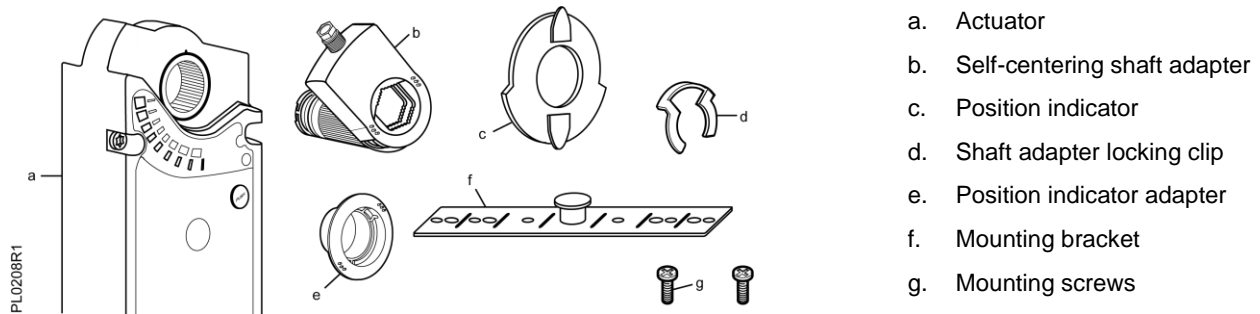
DKN-MS41-6353-Rotary Actuator Parts.
